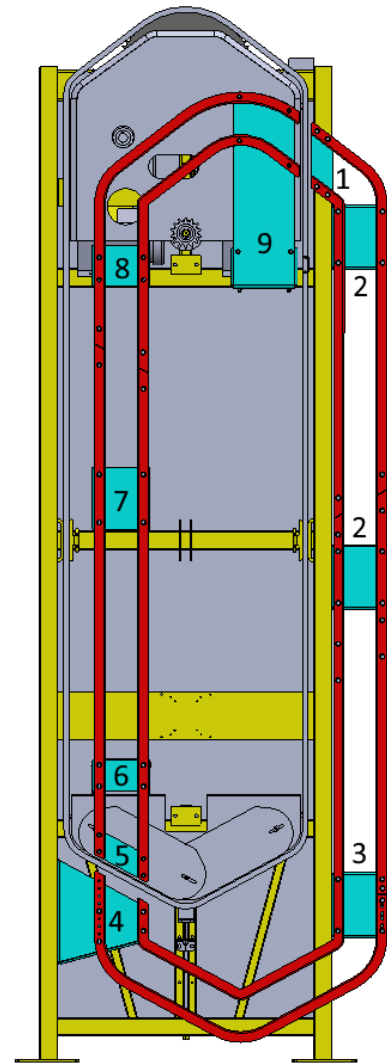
COLOUR-CODED RIGHT TOWER, HIGHLIGHTING THE GUIDE TRACK, FRAME, AND BRACKETS, IN RED, YELLOW, AND CYAN, RESPECTIVELY.
